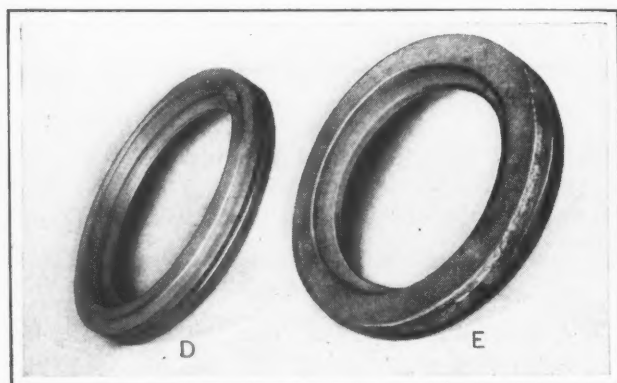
Rough and Machined Forging for Cam Gear Ring
